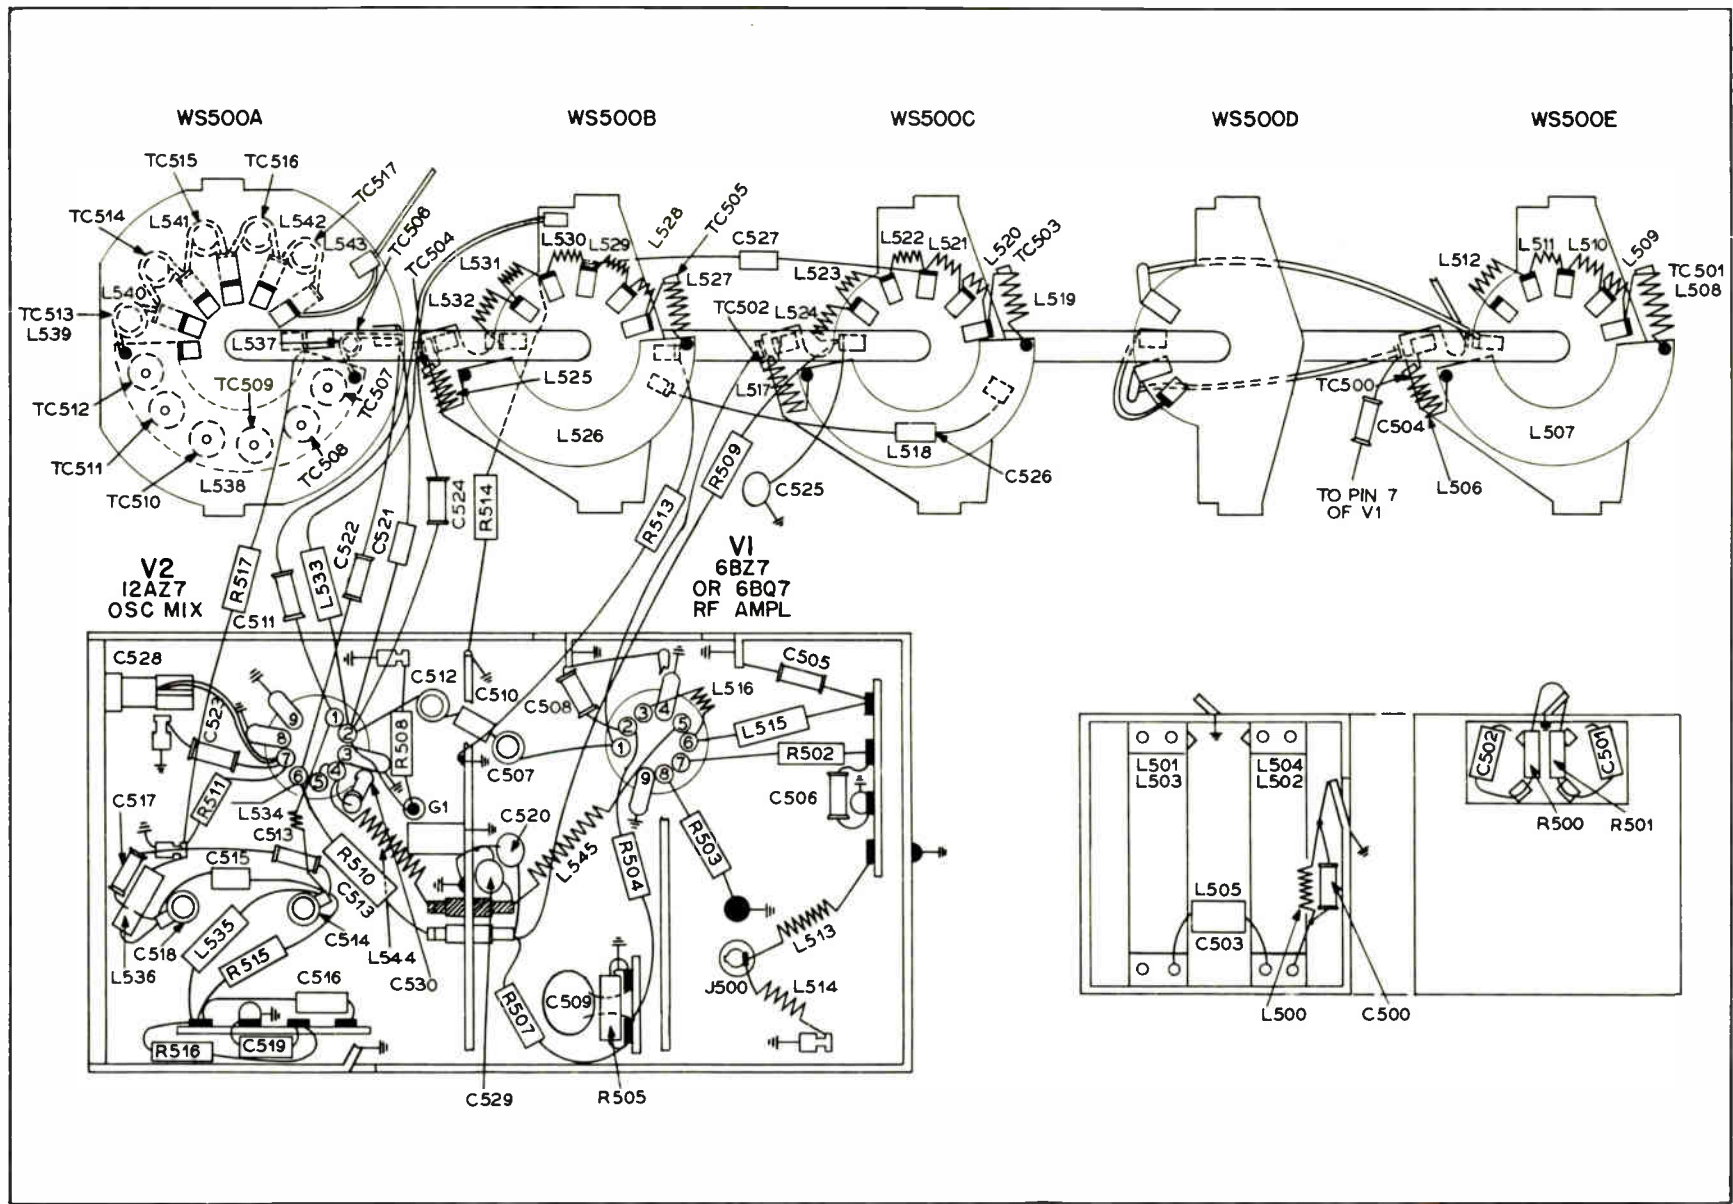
Television Tuner, Part No. 76-7600, Base Layout
